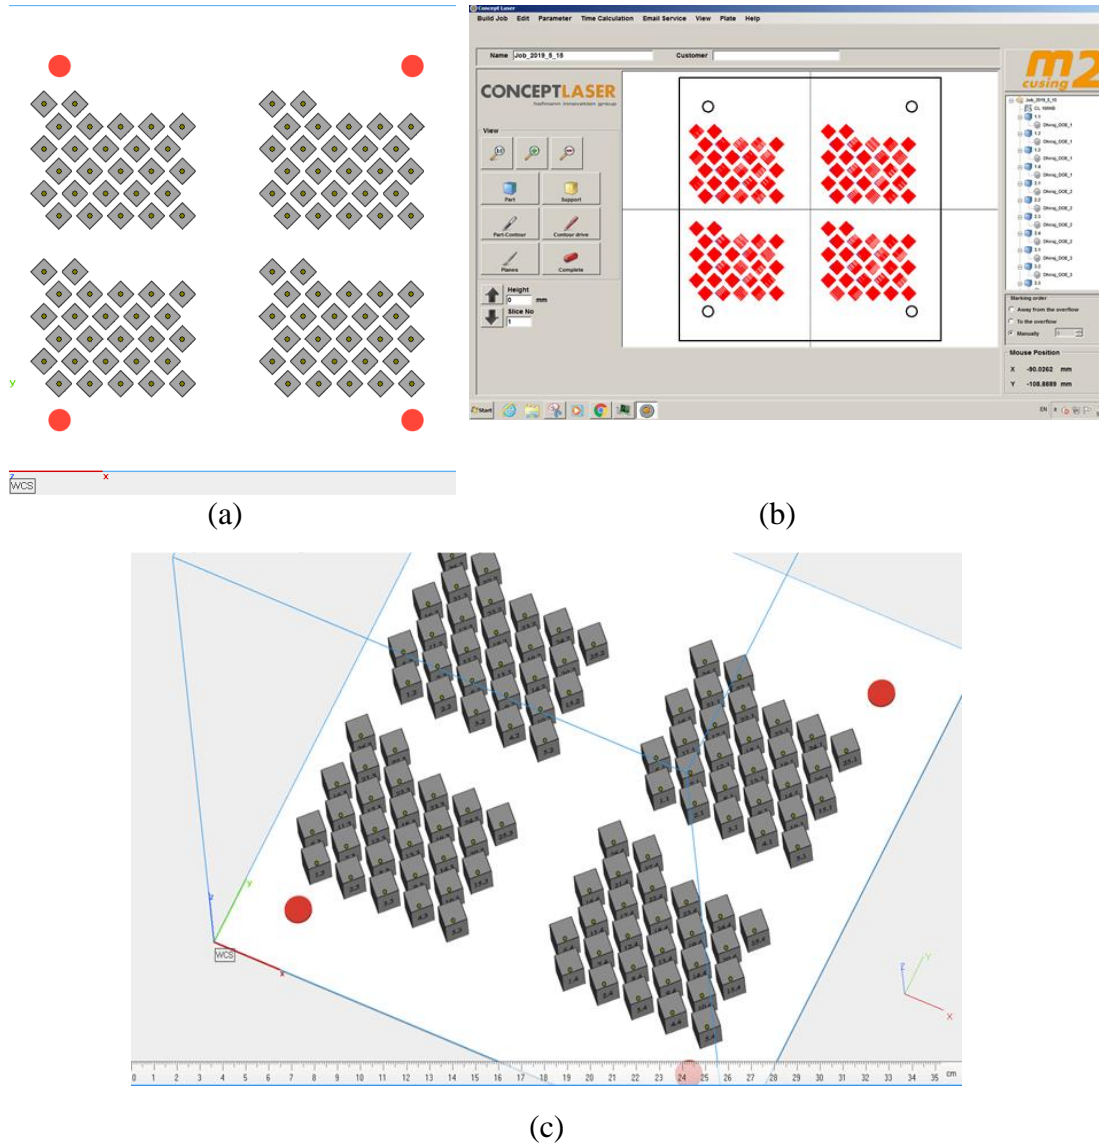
(a) Top view of build platform (b) Build illustration on machine (c) Angled view of the build platform
